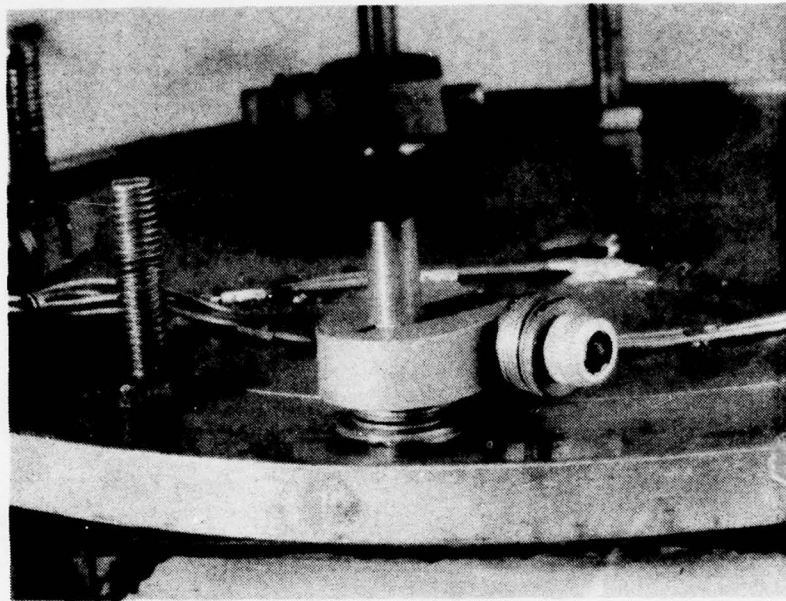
View of Collet Attachment of HPSi_3N_4 Ceramic Bolt
